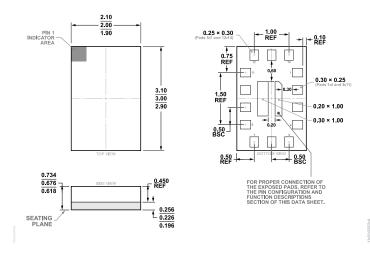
14-Terminal Land Grid Array [LGA] (CC-14-4) Dimensions Shown in millimeters
